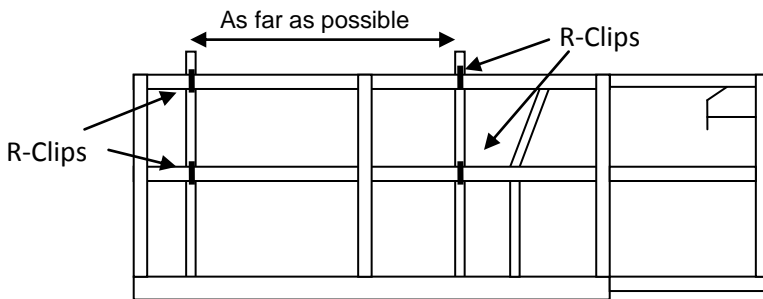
Heavy Pipe Lifter attachment installation – Deck extended
